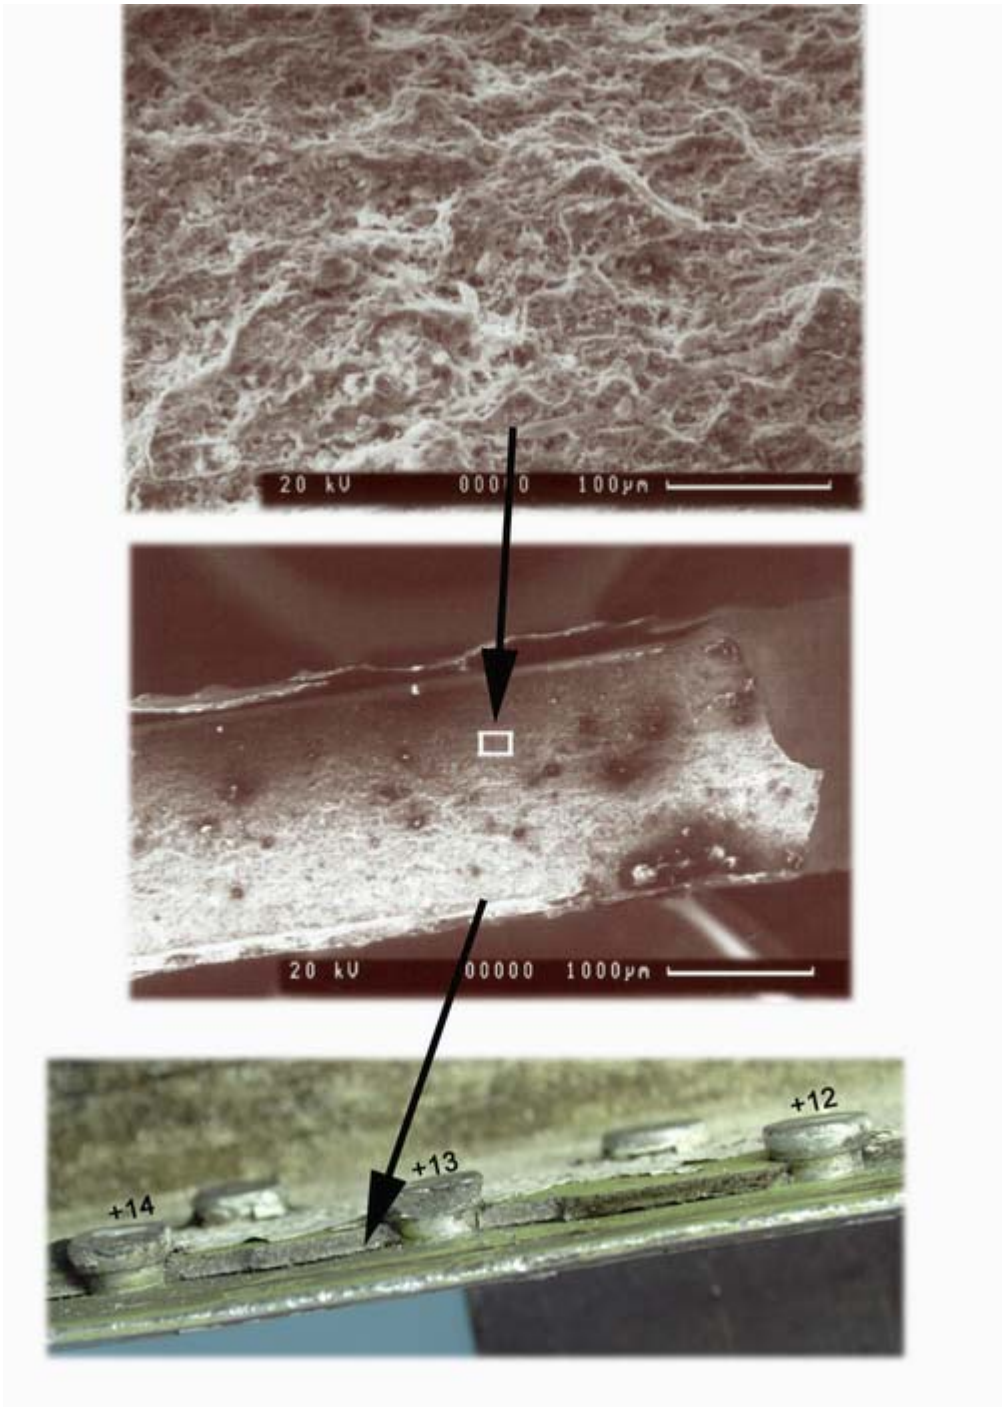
The fracture surface near rivet +13 contained less evidence of rubbing
